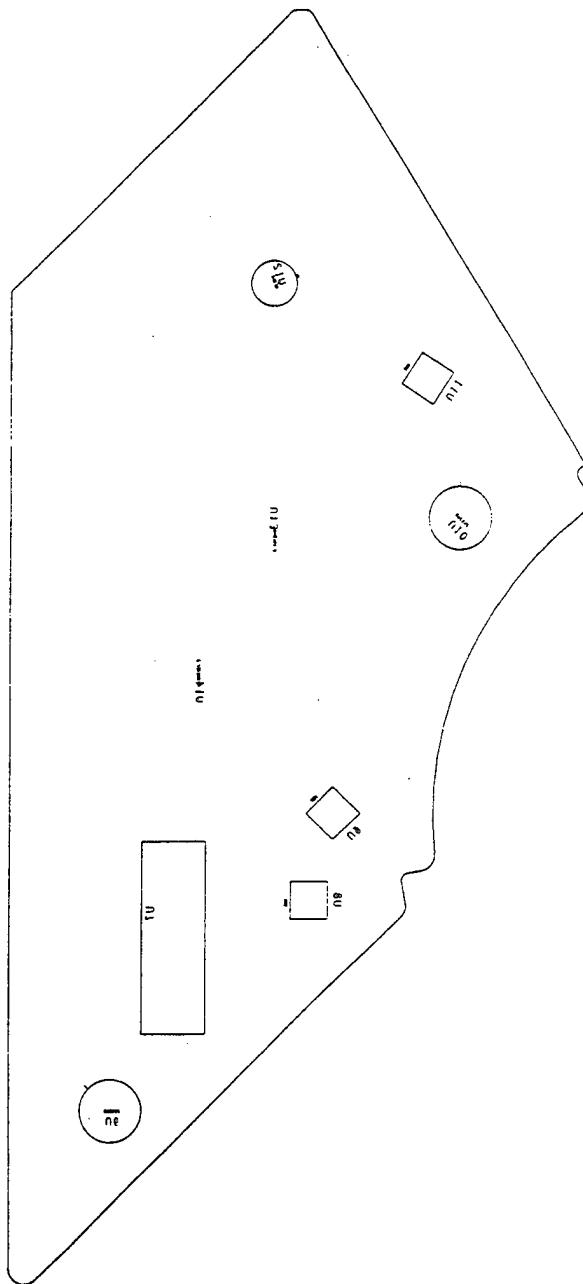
RF HPA PCB - Bottom Assembly Drawing
